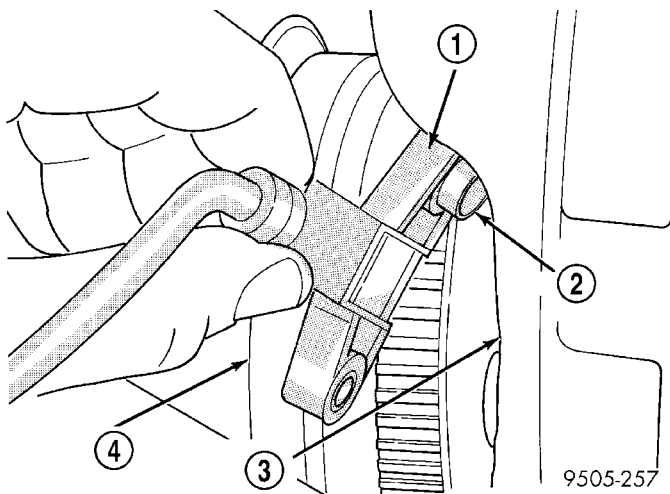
Installing Speed Sensor Head In Steering Knuckle
